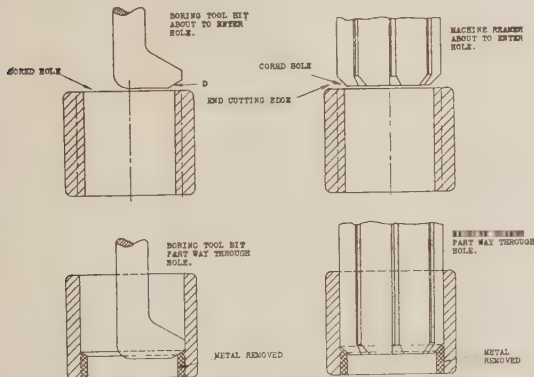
SIMILARITY OF CUTTING ACTION OF A BORING-TOOL BIT AND A REAMER
